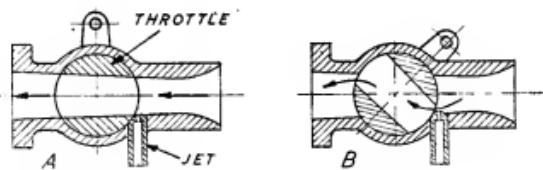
Barrel-throttle carburettor with passage shaped to promote full-bore discharge efficiency
